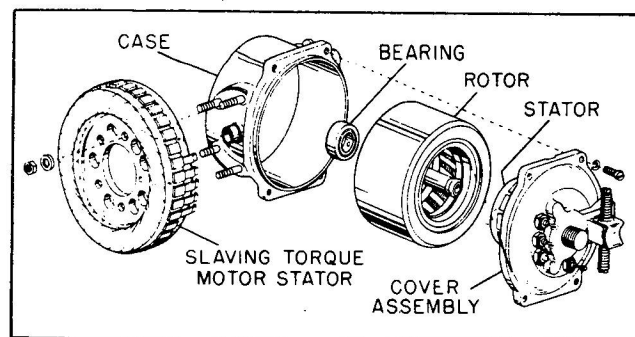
Exploded View of Gyro and Slaving Torque Motor Assembly S3-A/C
